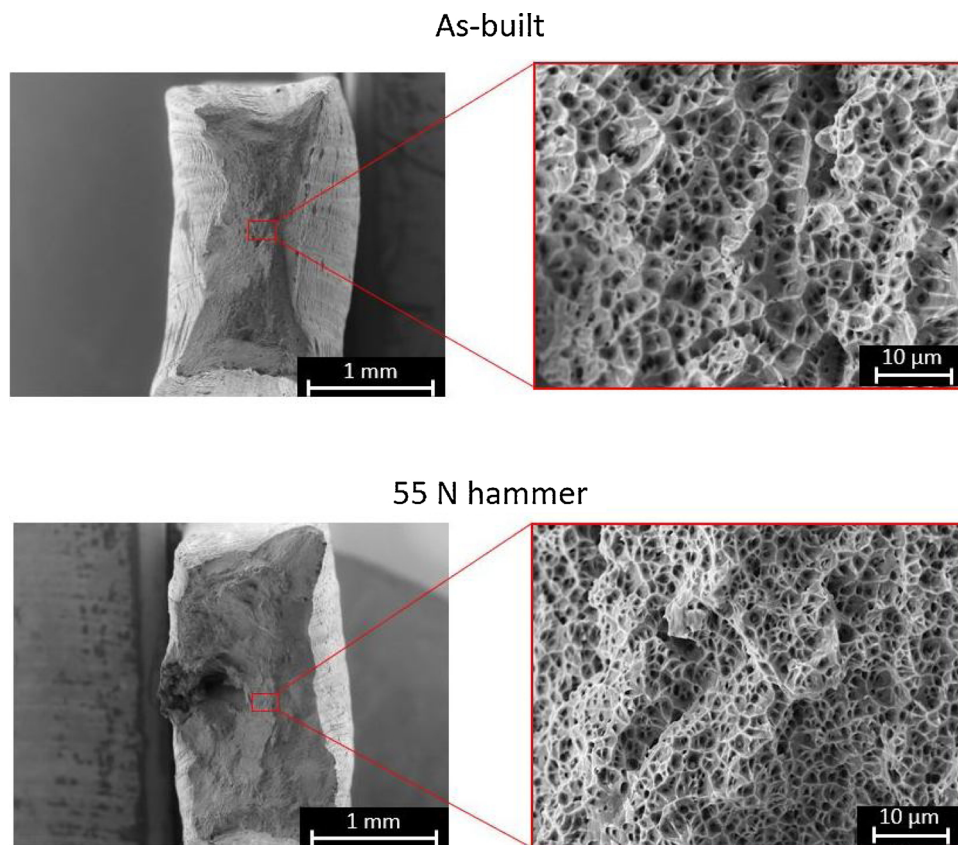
Fracture surface from uniaxial tensile test specimen for the as-built (top) and 55 N hammer (bottom).
